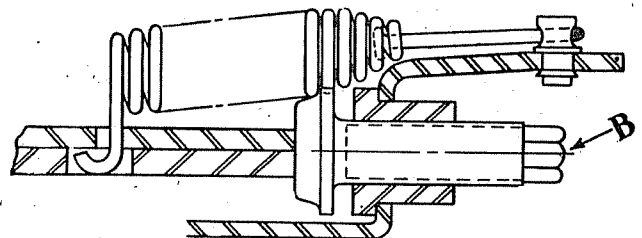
Lower Pull Back Spring and Adjusting Bolt.
